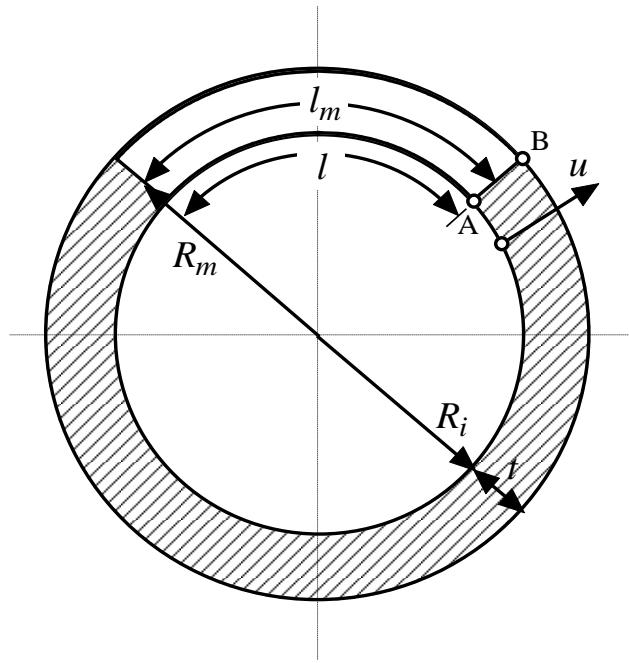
Circumferential through-thickness crack in a cylinder.
